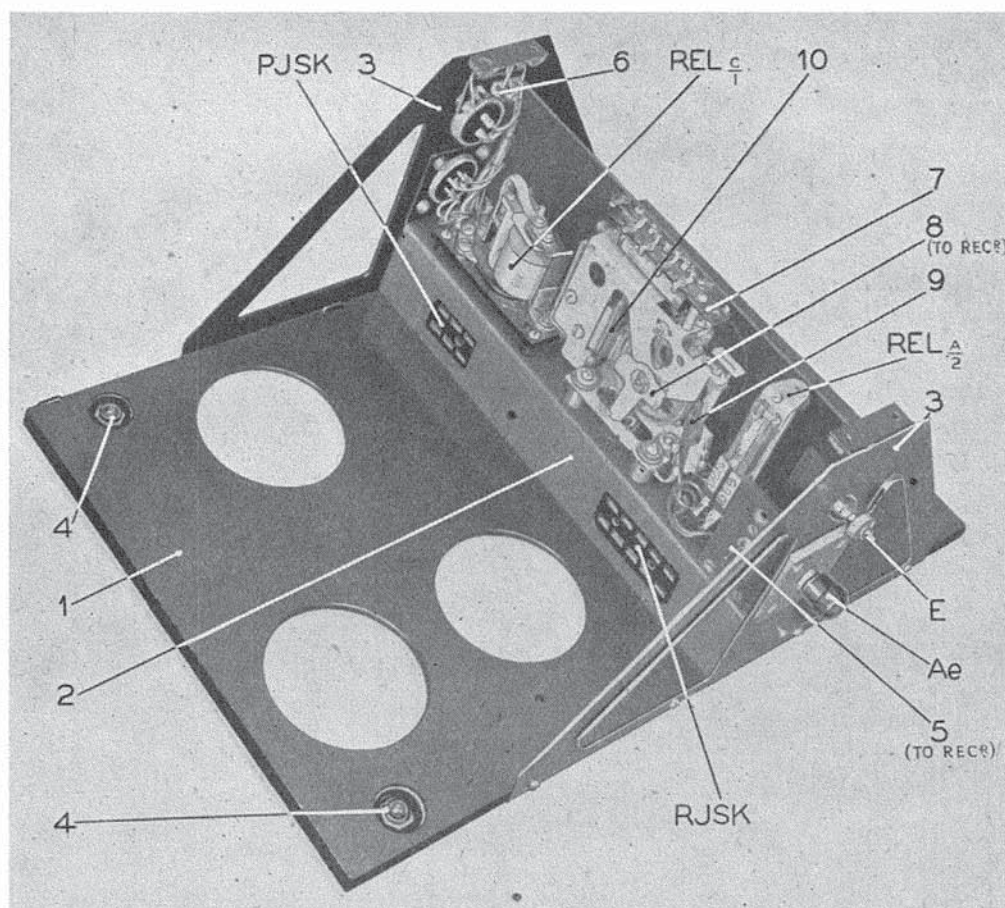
CHASSIS ASSEMBLY, FROM RIGHT-HAND SIDE
